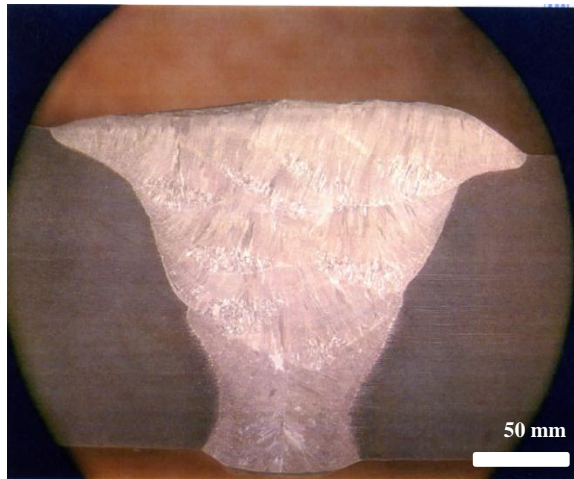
Macroscopic examination of 316Ti welded steel specimen.
